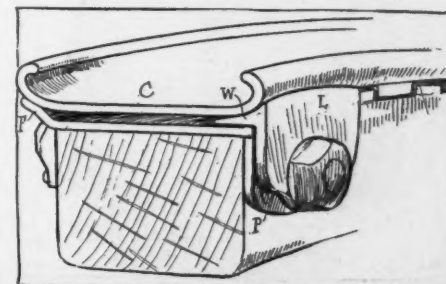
CONTINENTAL DEMOUNTABLE RIM
